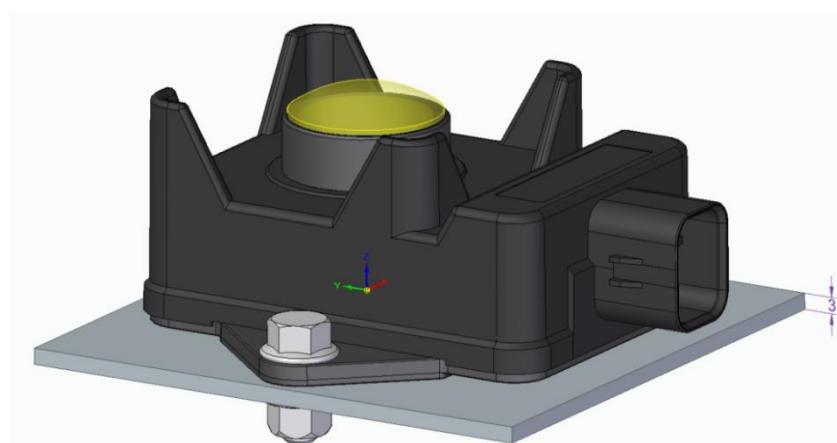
Mounting on a thin soft steel plate (≥ 3 mm)
